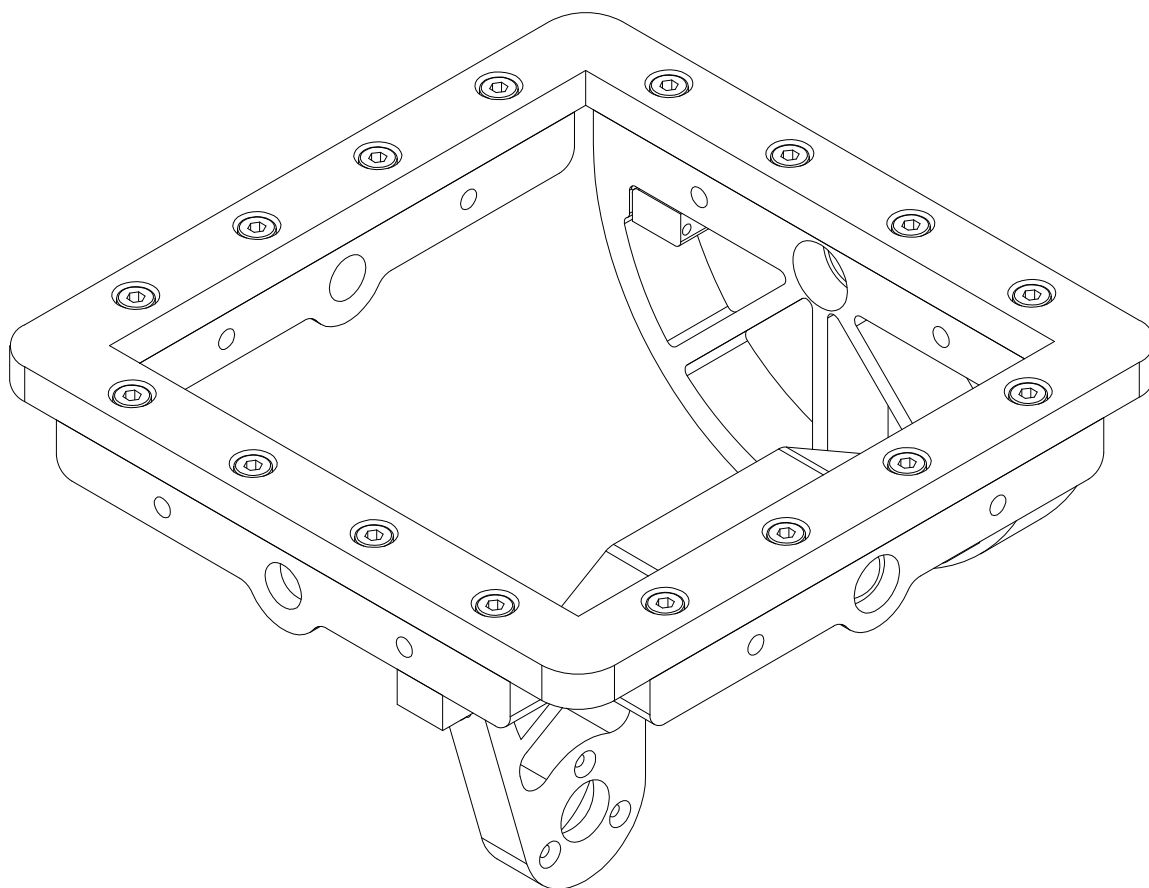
X-stage assembly including the X-deck, X-stage capstan, X and Y stage bearing braces and Y-stage motor.
